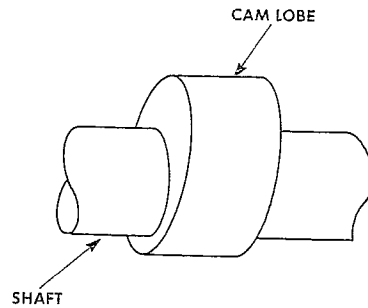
A camshaft is a shaft with a bump or lobe.
